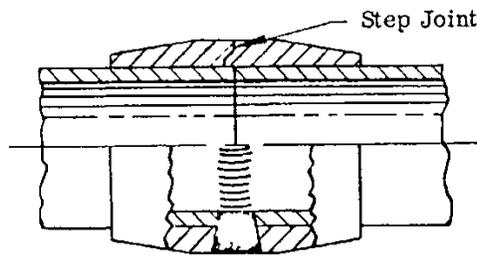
SWAGED-SLEEVE WELD JOINT
